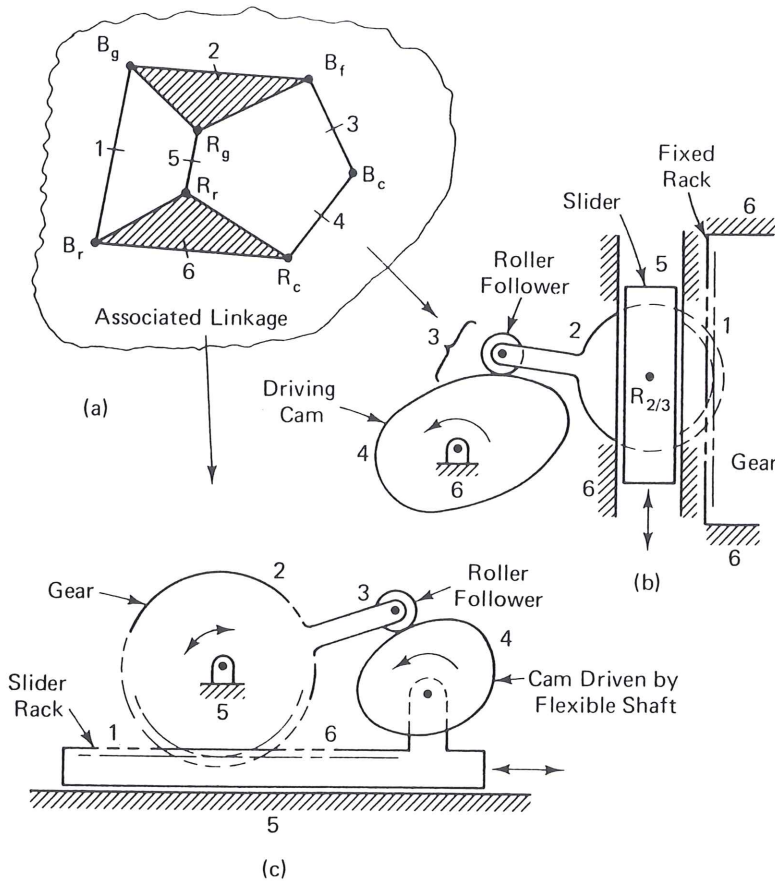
Cam-gear-slider mechanisms derived from Stephenson's chain.
